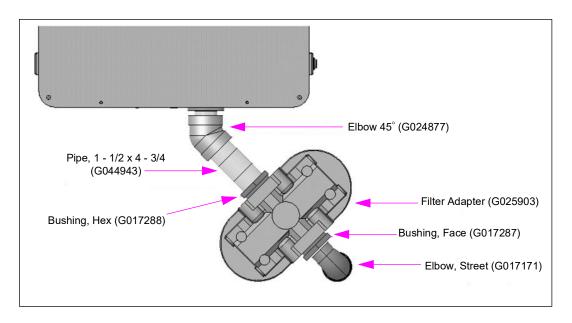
Parts in the Gasboy External Filter Kit (G032752 and G032753)
